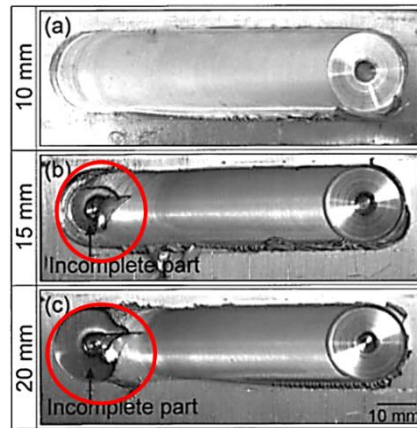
Surface finish of weld joint with different pilot hole sizes [48]
